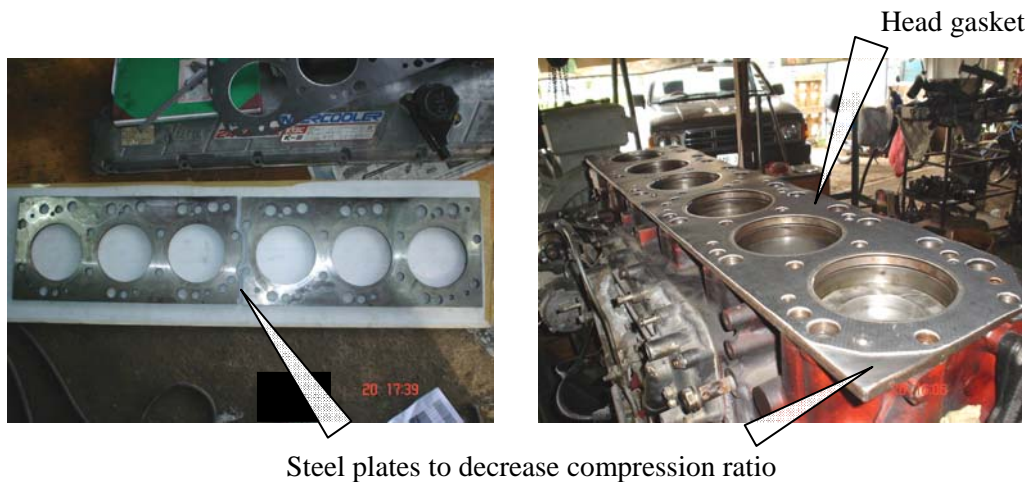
A picture of the steel spacer and two standard gaskets installed on the cylinder block.
